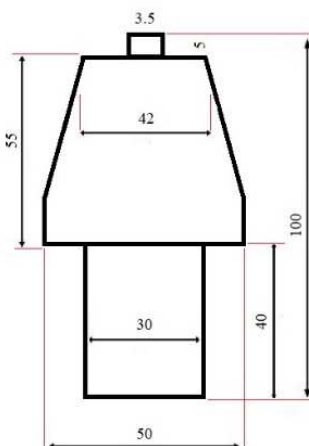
Hot steel welding cylindrical tool with square and cylindrical pin
